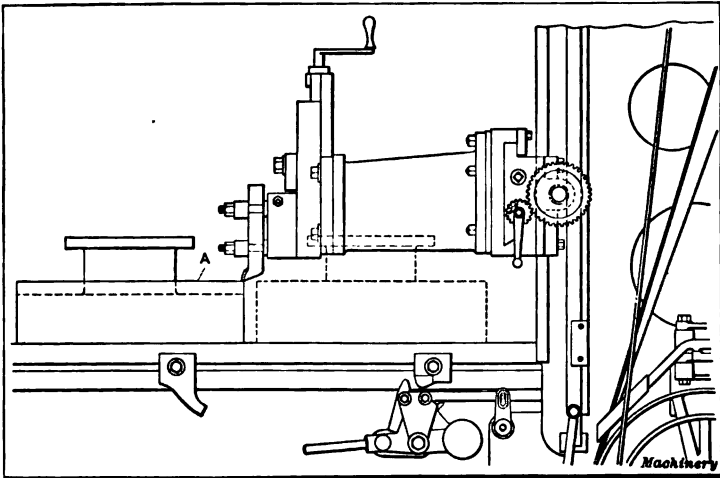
Extension Head Used for Planing Parts which are too Wide to Pass between Housings
